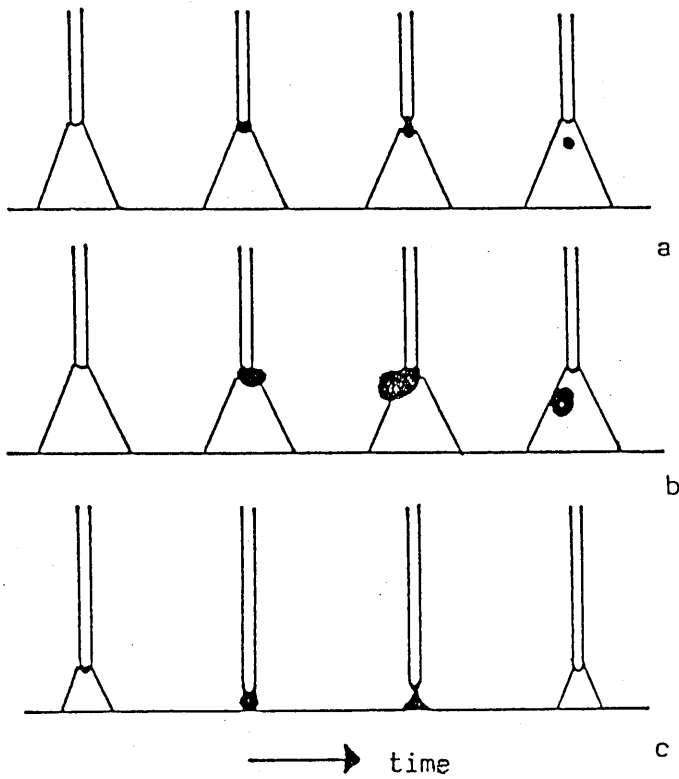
The three metal transfer modes in GMA Welding
